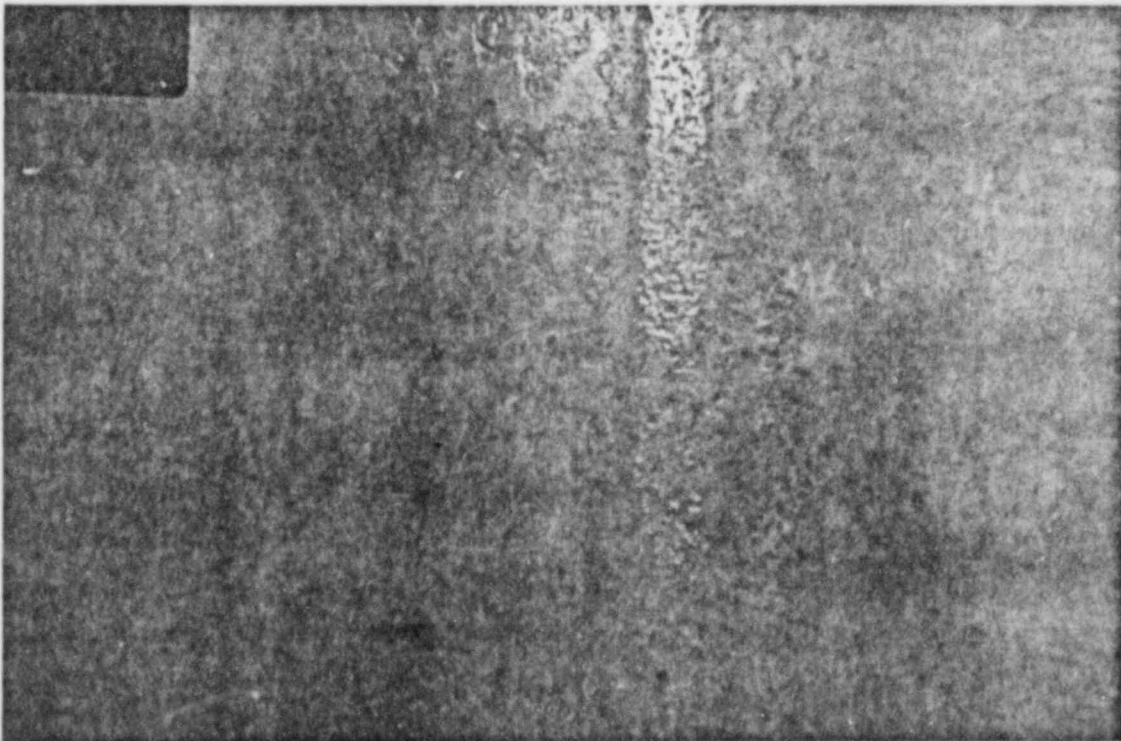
Tank 8D-2 Weldment After Wire Brushing,
